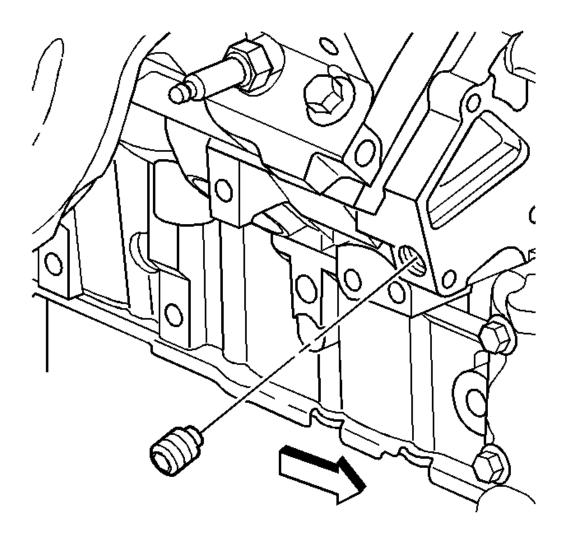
Locating Threaded Gallery Plugs Courtesy of GENERAL MOTORS CORP.
